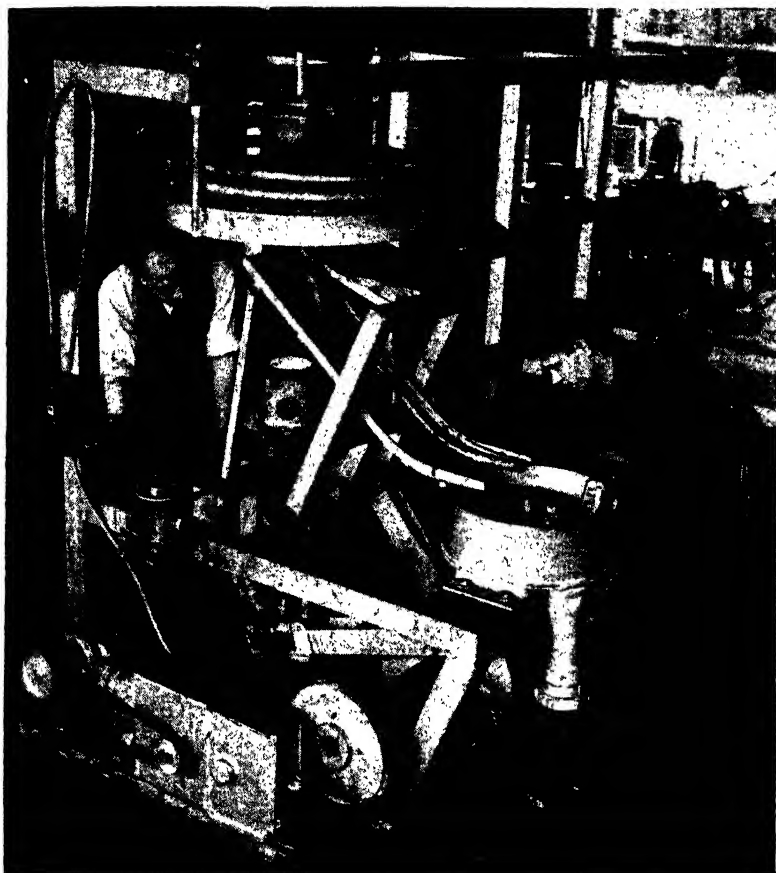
The design and construction of such specialized machines as this automatic sheave wheel hardening machine (in process of development) is a practical and economically sound outgrowth of practice in designing and welding simpler shop fixtures such as bins, skids, brackets, motor bases, and other simple equipment. (Courtesy of R. G. LeTourneau, Inc.)
